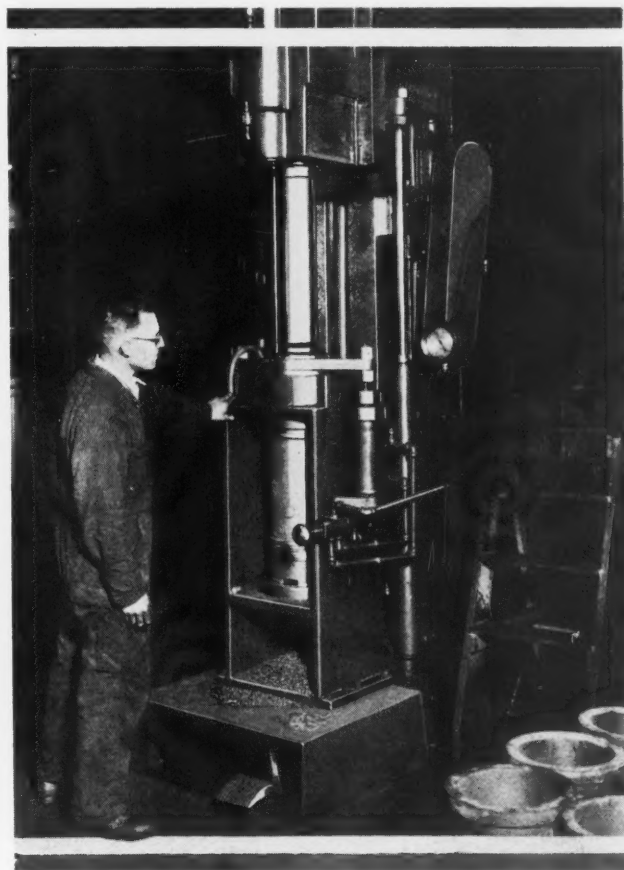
Boring and Reaming Liners for Diesel Engines on a Baker Hydraulically Fed Drilling Machine
